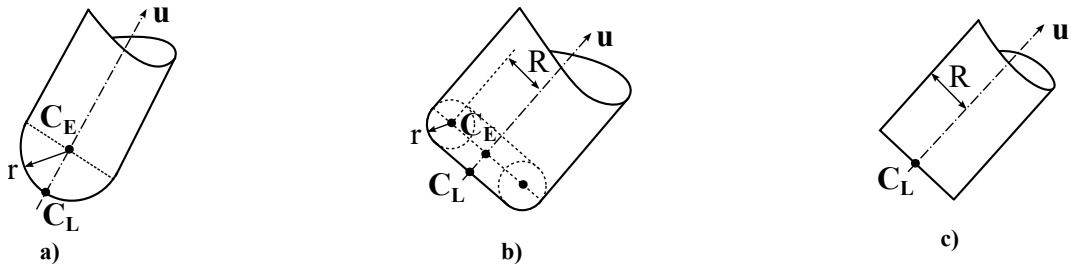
Tool types: a) Hemispheric tool; b) Toric tool; c) Cylindrical tool
